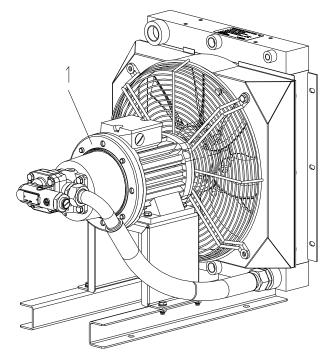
Oil/air cooler; example: OPC200to OPC400
